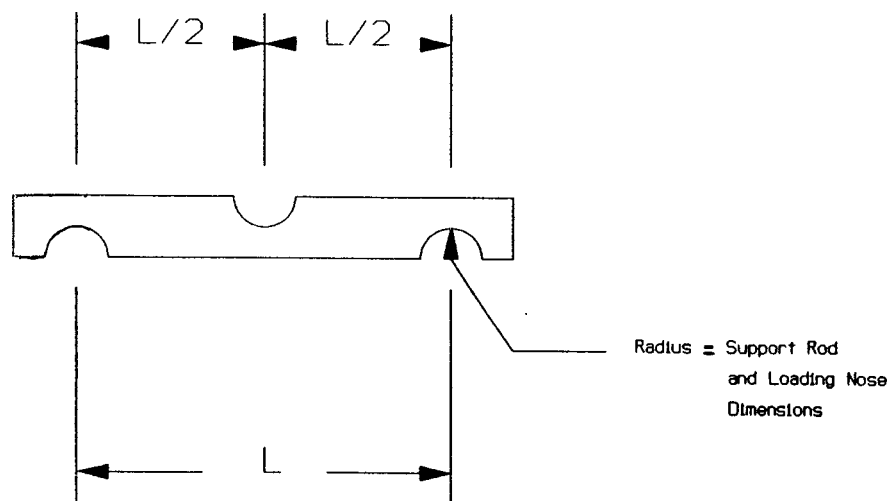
Fixture Used to Set Loading Nose and Support Spacing and Alignment
